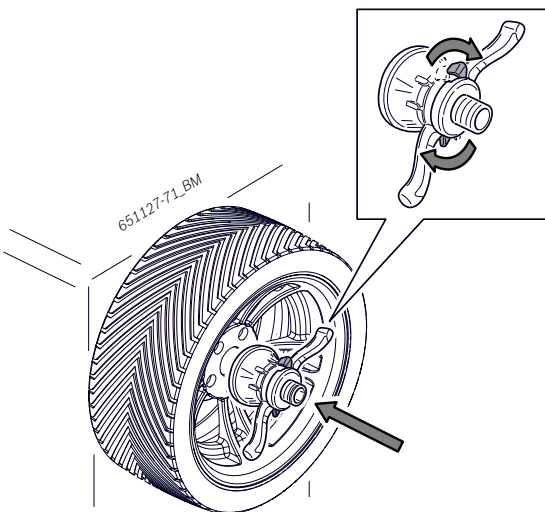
Positioning the disengaged quick-locking nut on the shaft
